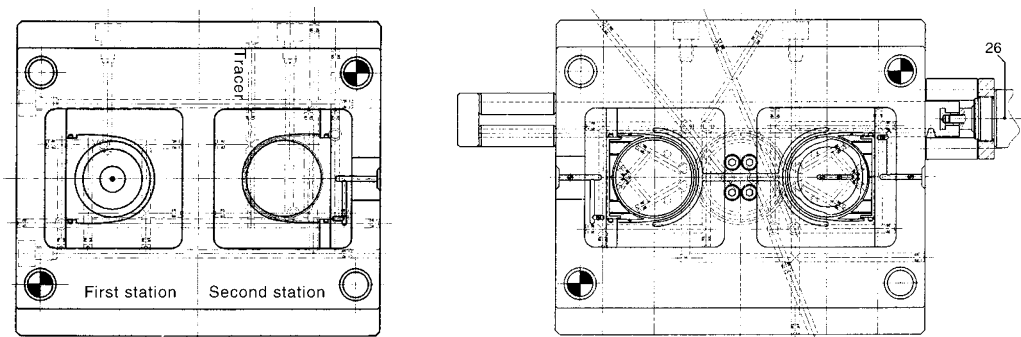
Simplified view of the fixed (left) and moving (right) mold halves
